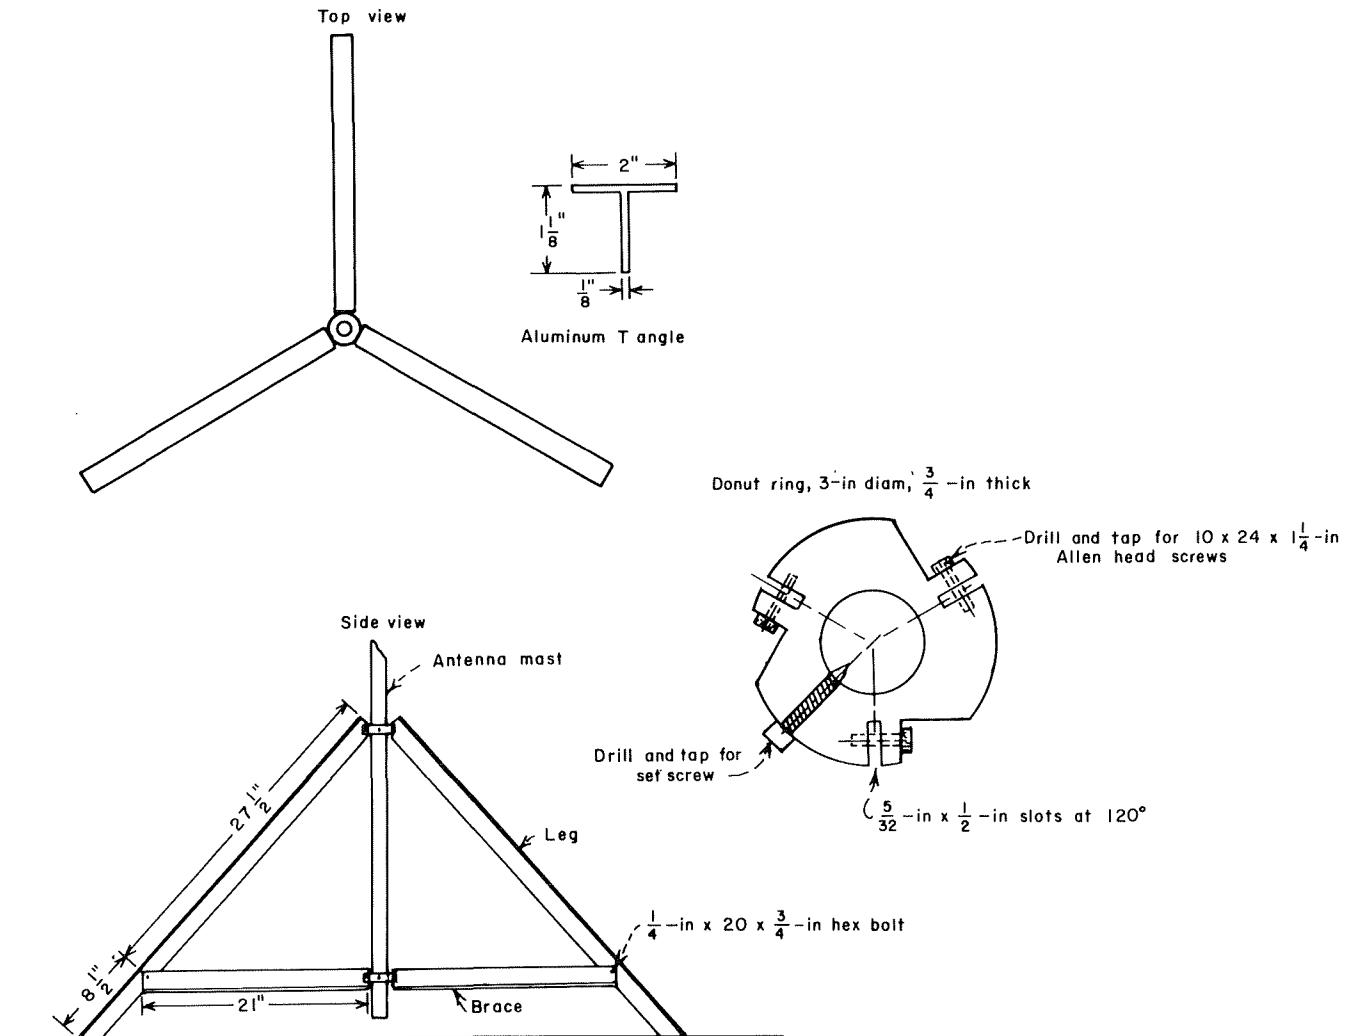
Design details of antenna mast and tripod base assembly.
